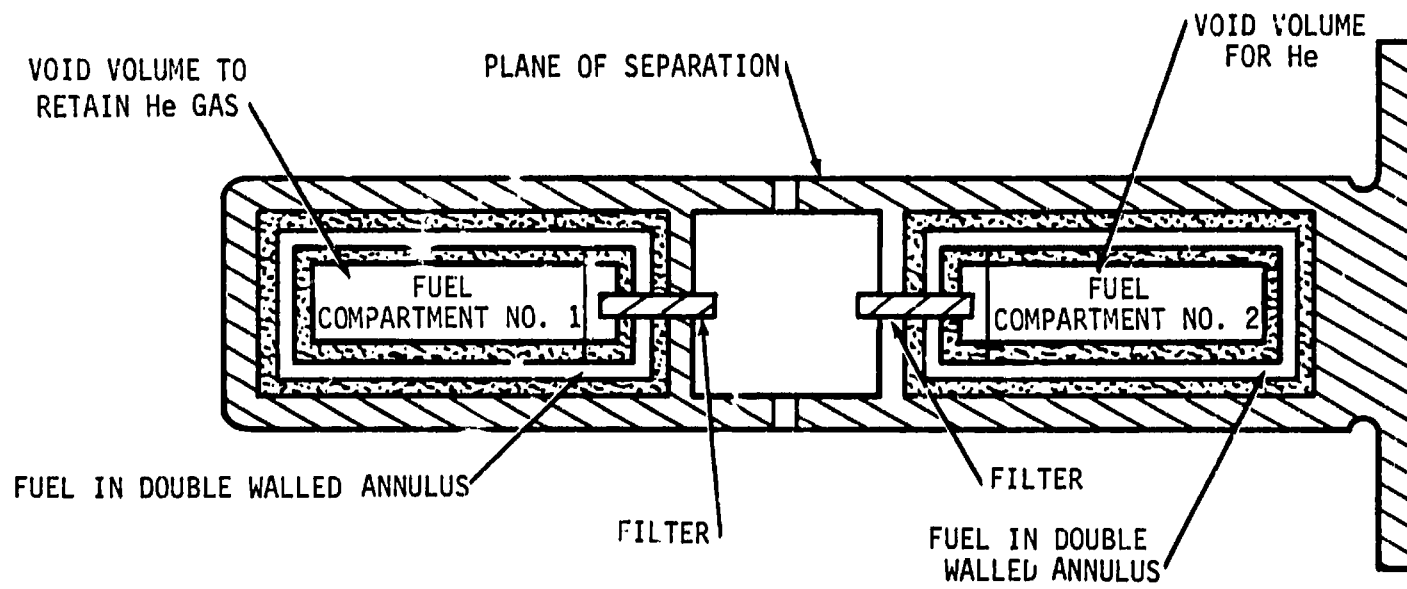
FUEL CAPSULE ASSEMBLY DESIGN FEATURES.
